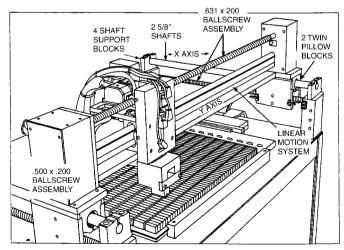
Punch Press: Catalog pillow blocks and rail assemblies were installed in this system for reducing the deflection of a punch press plate loader to minimize scrap and improve its cycle speed. *Courtesy of Thomson Industries. Inc.
